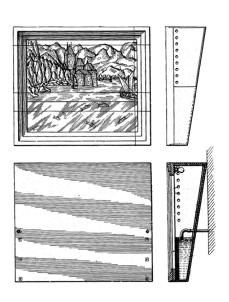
1930: Charles Trovato's wall aquarium.
